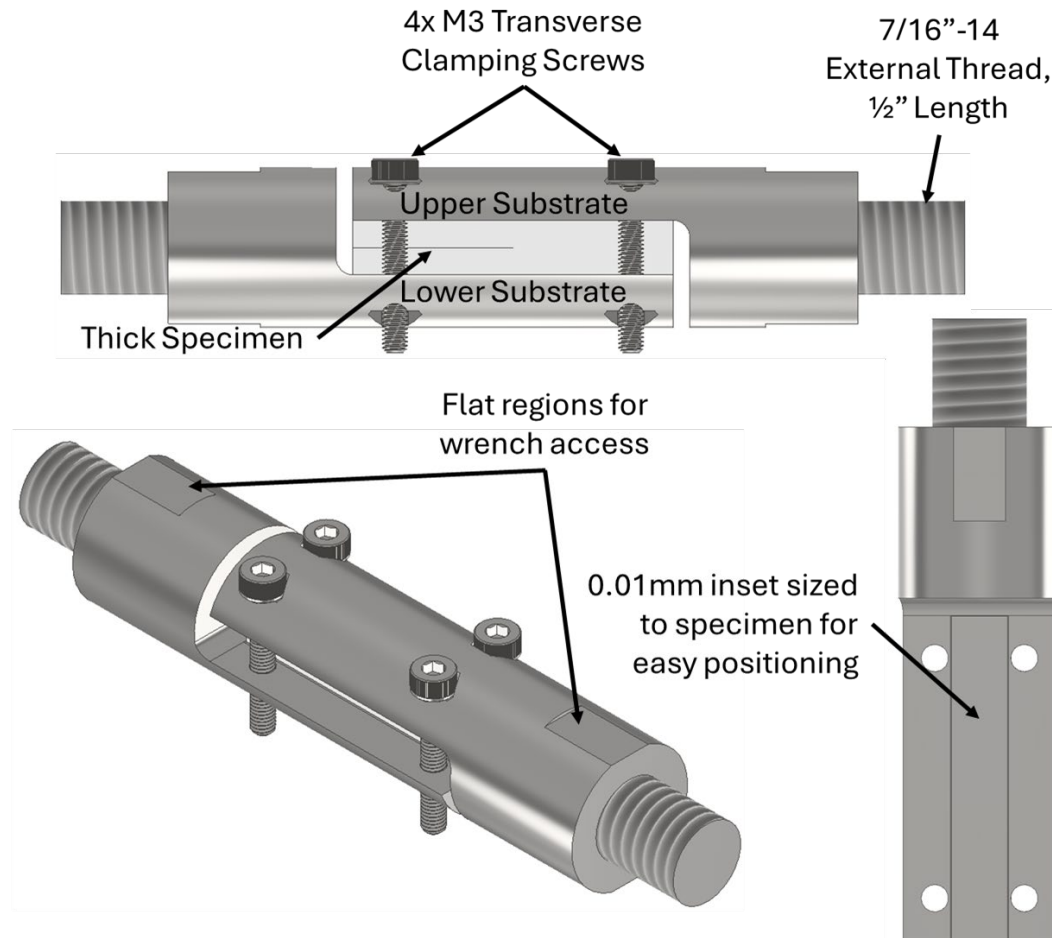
Simple shear fixture for thick specimens. The thin specimen fixture is identical, aside from the specimen mounting surface being raised to account for the reduced specimen thickness and to provide a flat surface for DIC speckle application.
